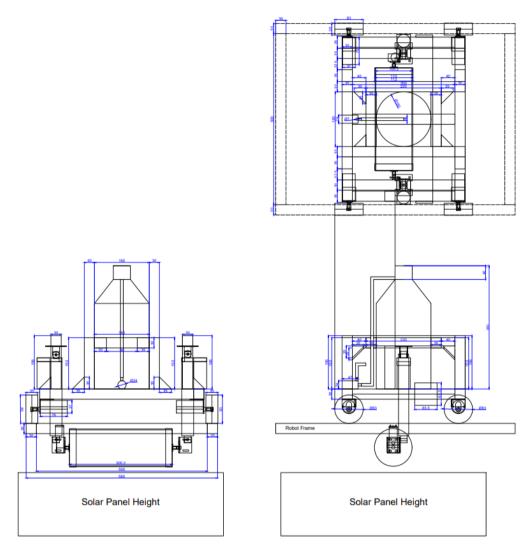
Orthographic Drawing of Cleaning Robot.
